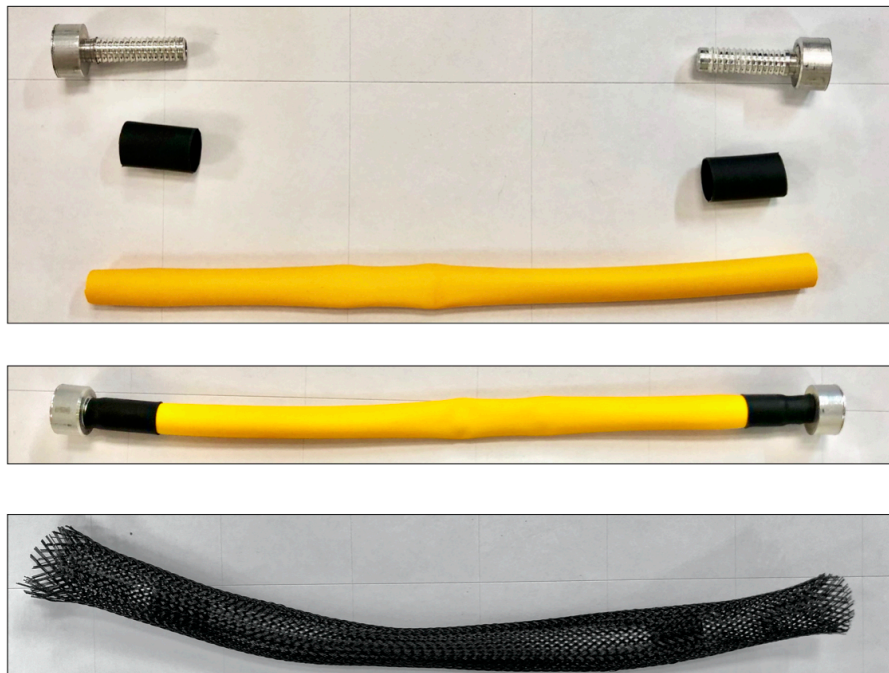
Assembly of a PAM. Upper image: 2 end parts, (black) heat shrink, and a (yellow) balloon. Middle image: the balloon is attached to the end parts, and heat shrink is added to close it off. Bottom image: the cable sleeve is put around the balloon.
